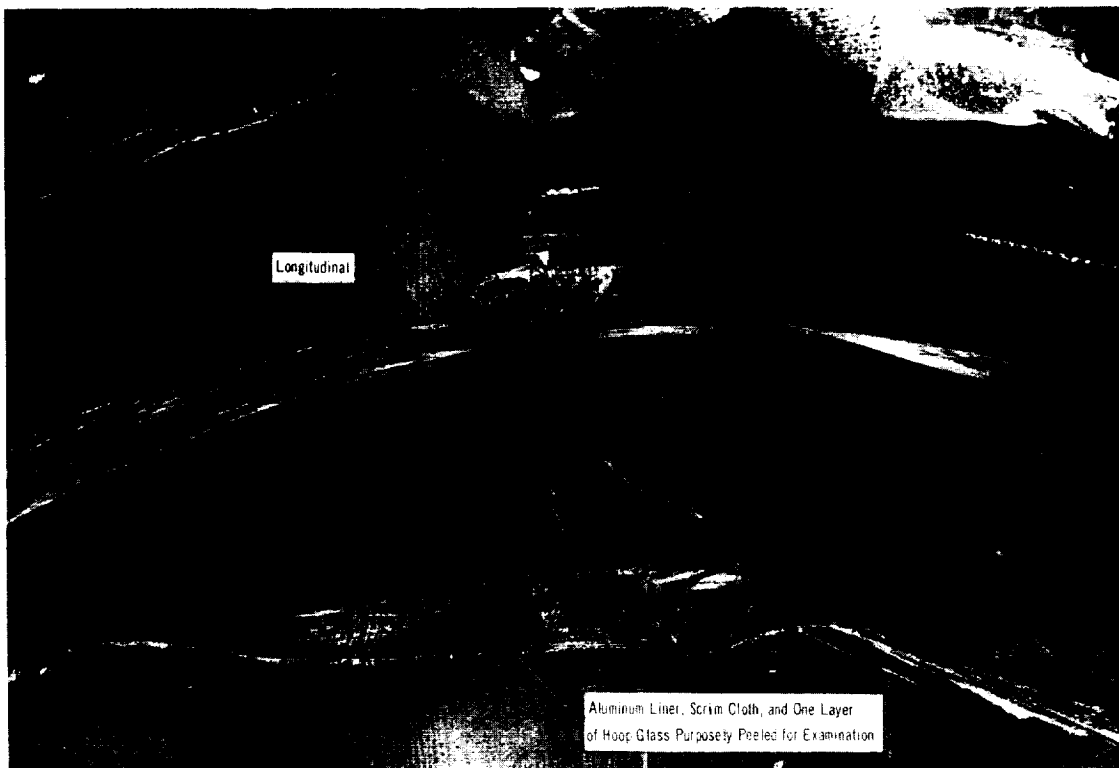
Vessel TA-2 – Post-Test Closeup View of Failure End
